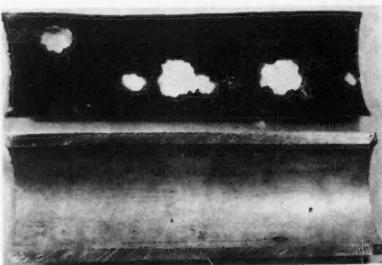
Longitudinal section through an Alclad 3S condenser tube which outlasted two successive sets of 3S condenser tubes. The Alclad 3S tube in this test was prepared by placing a 72S tube inside of a 3S tube and drawing them down together. Since no metallic bond was obtained by this method, it is possible to remove the 72S coating when the tube is sectioned. In this picture, the 72S coating has been removed from the 3S core. Note that although the 72S coating is perforated by corrosion, no appreciable attack has developed even in exposed areas of the 3S core. This is an excellent demonstration of the electrolytic protection afforded by the 72S coating to the 3S core.
